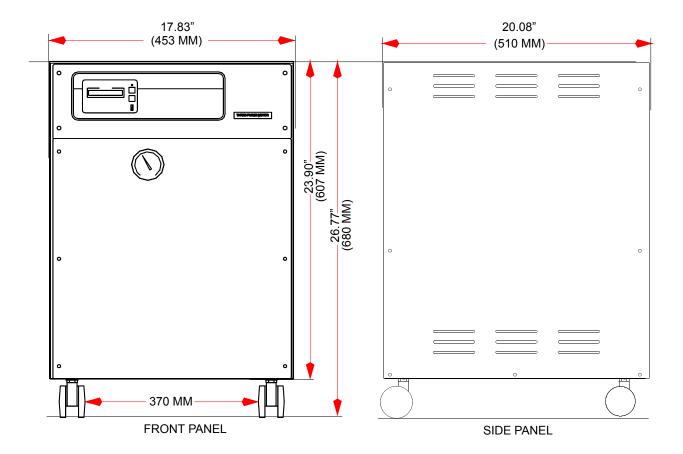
8600 Compressor Side and Front Dimensions, Type 01
